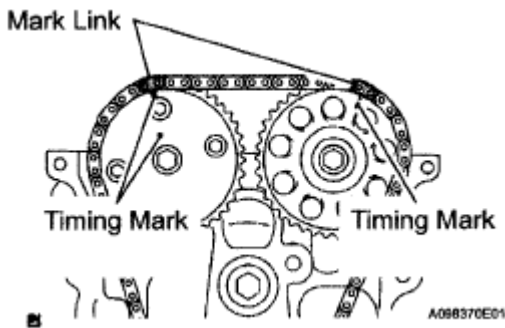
Identifying Timing Mark On Camshaft Timing Gear And Sprocket
